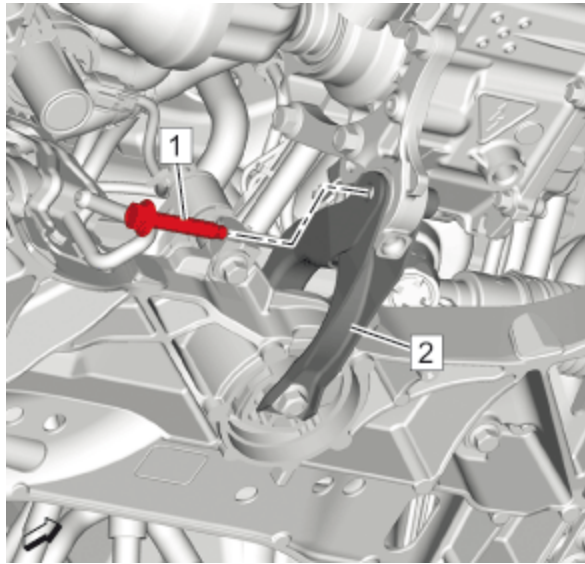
Transmission Mount Strut Bolt And Transmission Mount Strut
